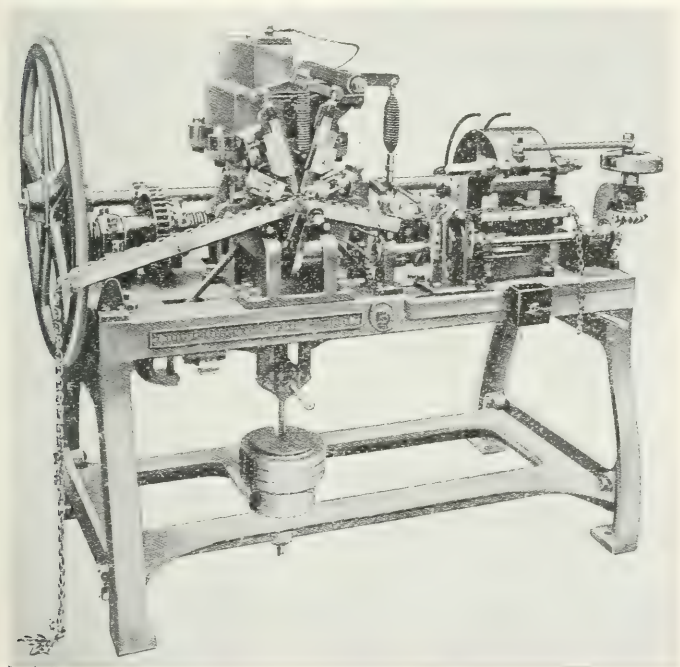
ELECTRIC CHAIN WELDER
